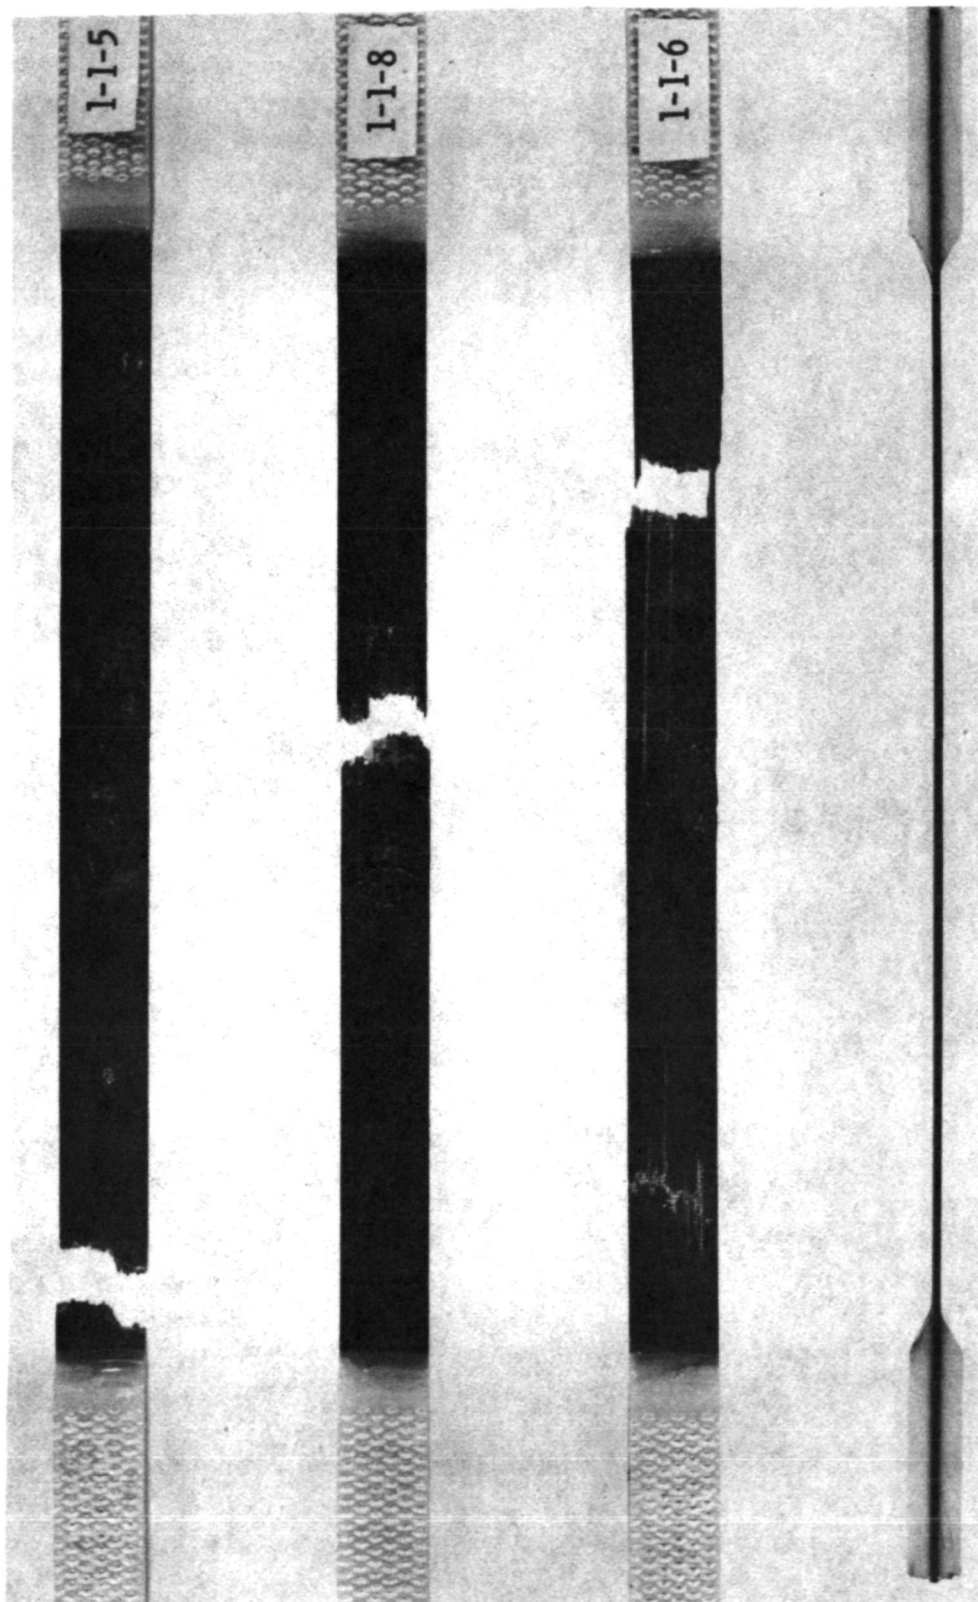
Typical Failures of [0] Boron/Epoxy Laminates Subjected to Longitudinal Tension Loading
